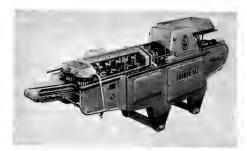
Design of the base of the new fish-gutting machine allows for a conveyor to be placed undermeath the machine for removal of the offal. The handle on the left hand side permits the tilting and lifting of the upper assembly for better access to the cutting tools for maintenance and cleaning.
